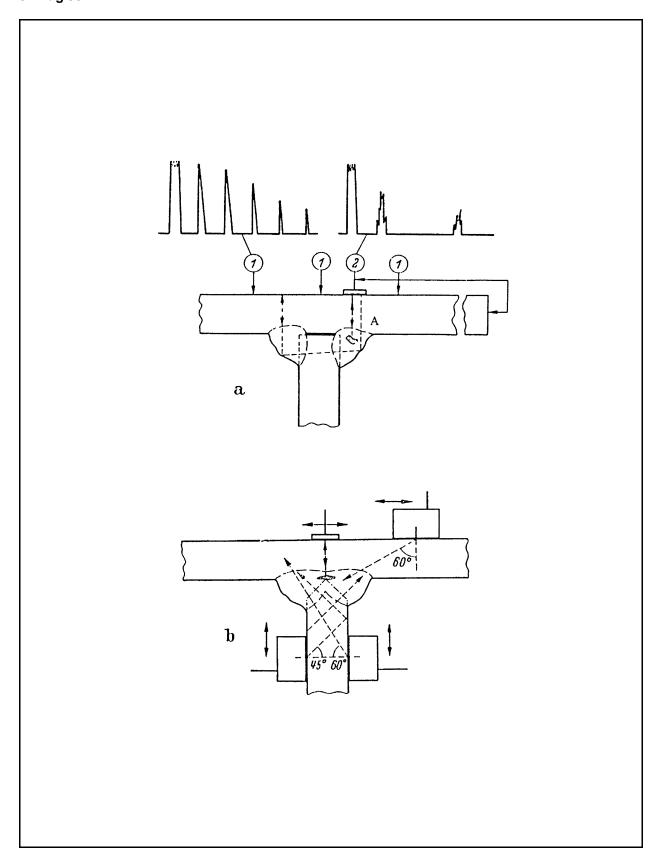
Testing fillet welds; (a) joint not welded through, (b) joint welded through (K-joint)
